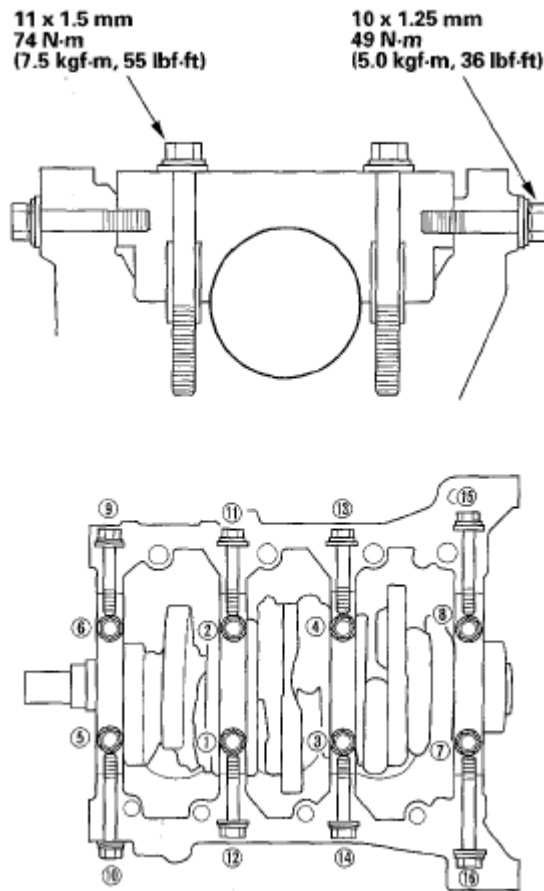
Identifying Bearing Cap Bolts Tightening Sequence With Torque Specifications
